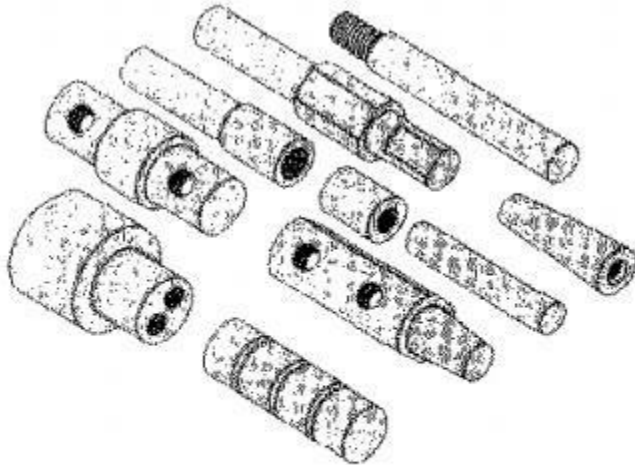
A family of parts with similar manufacturing process requirements but different design attributes. All parts are machined from cylindrical stock by turning; some parts require drilling and/or milling.
